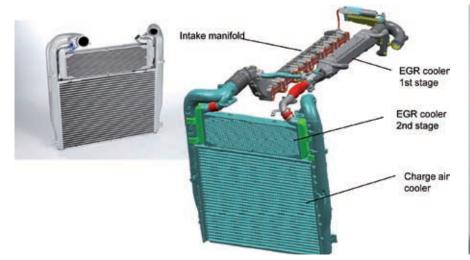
Two-stage EGR cooling: 1st stage coolant cooling, 2nd stage air cooling. EGR cooler integrated in charge air cooler
